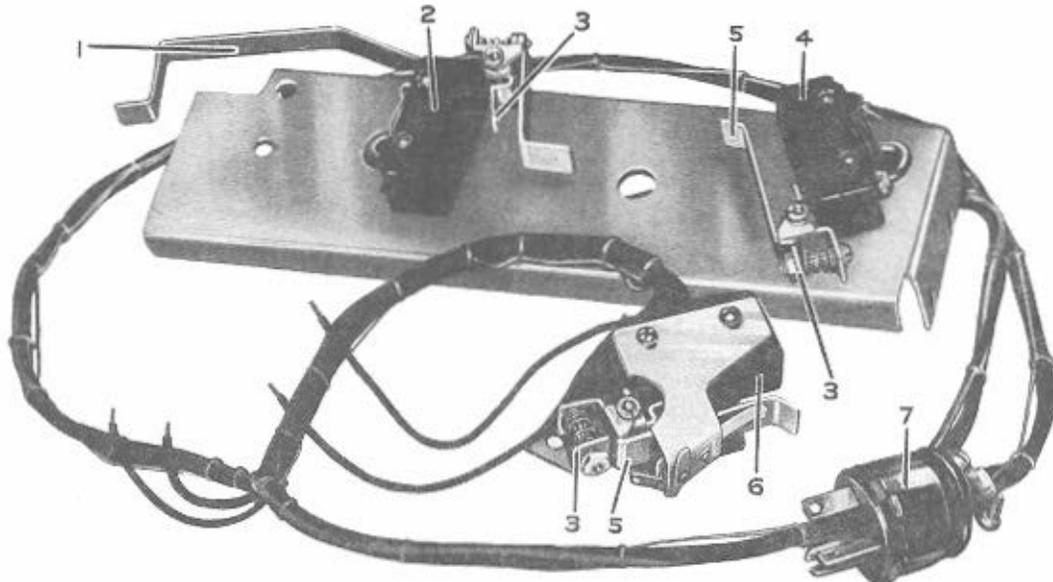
No. 11698-A Cam Shaft Support Assembly
